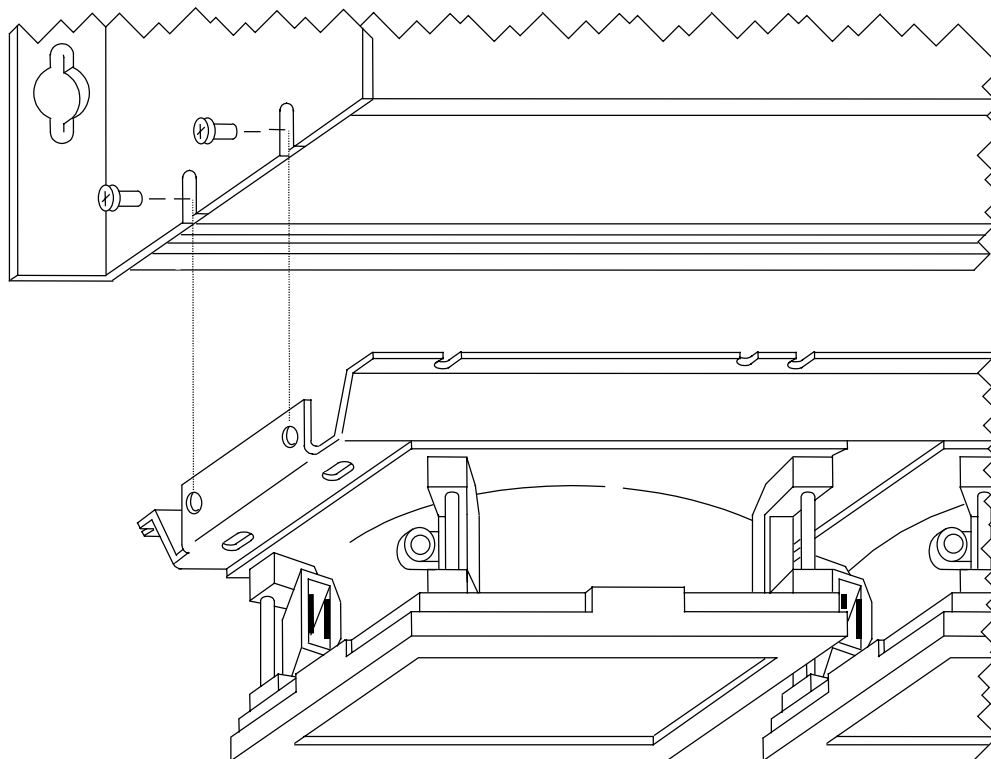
Mounting Details for Fan Assembly (AC Type Shown)
